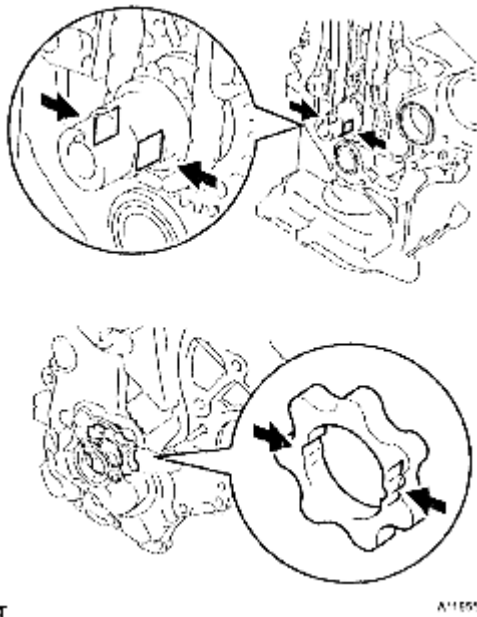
Aligning Keyway Of Oil Pump Rotor
